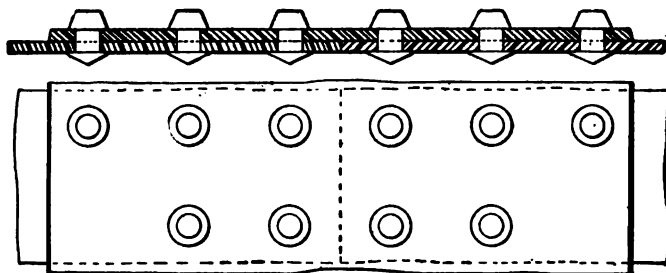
TREBLE RIVETED SINGLE STRAP.
